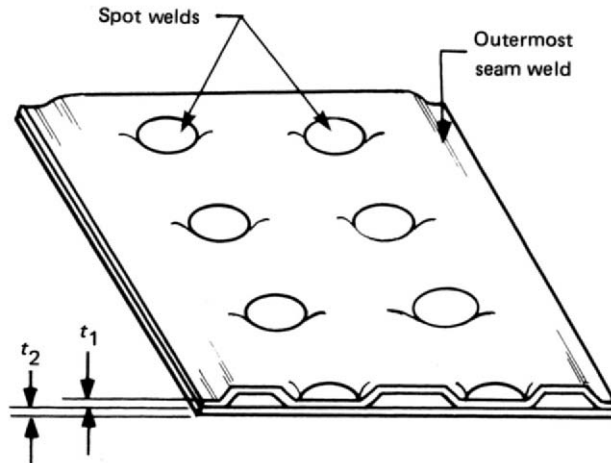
DIMPLED PLATE WELDED TO PLAIN PLATE
